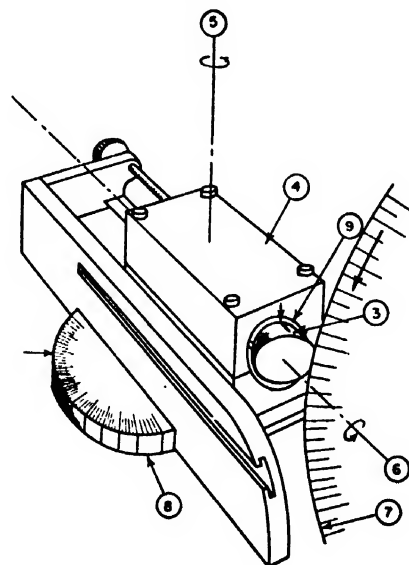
Drawing of jig holder for sectioning of cylindrical single crystals (1) Film cassette; (2) x-ray pinhole; (3) crystal; (4) jig; (5) vertical axis rotation; (6) horizontal axis rotation; (7) cutting wheel; (8) graduated circle; (9) fiber spacer.
